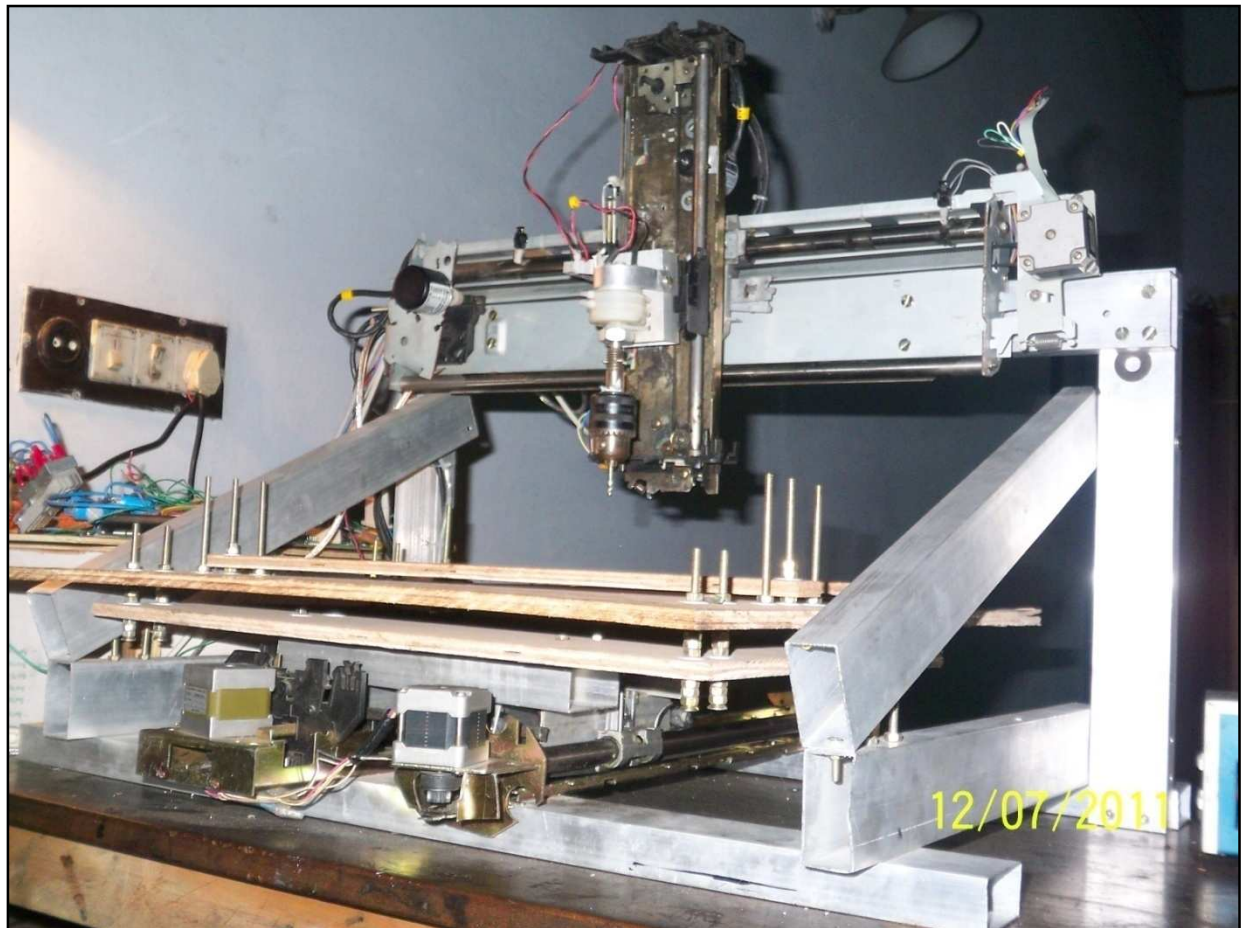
Design of 3 Axis Vertical Milling Machine
